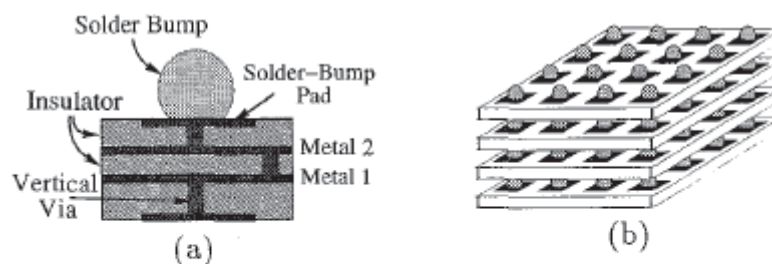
(a) The solder bump, pad, and vertical via geometry; and (b) stacked 2D FPGA dies.
